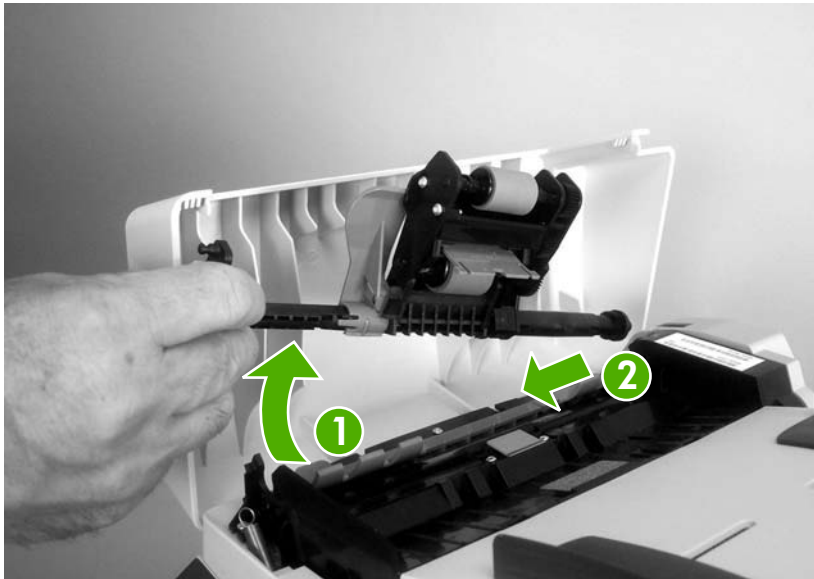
Replacing the ADF pickup-roller assembly (4 of 6)
